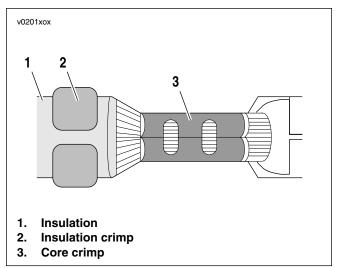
Inspect Core and Insulation/Seal Crimps
